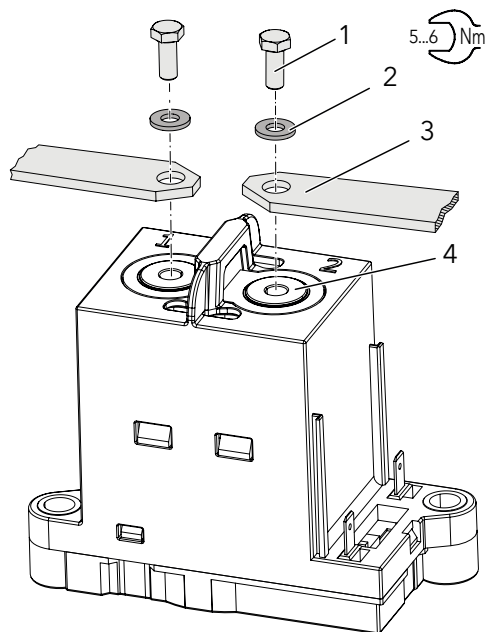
C303-XXX-G0F-...: Connecting the main contacts (connection example using busbars)
